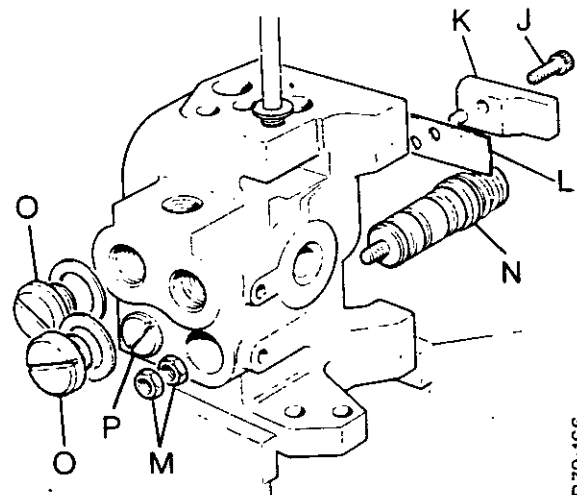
DISASSEMBLY OF THE SELECTAMATIC VALVE
